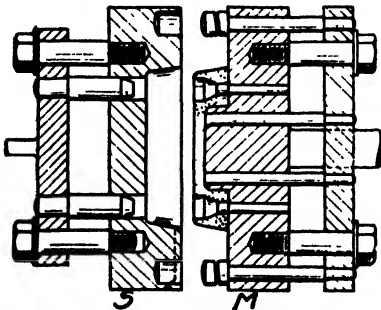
Die-casting Mold Operation—Stage 3.
